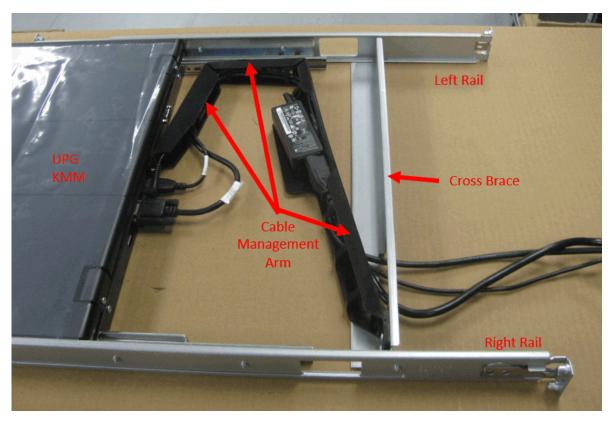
KMM rail assembly with cable management arm, cross brace, and cables installed
